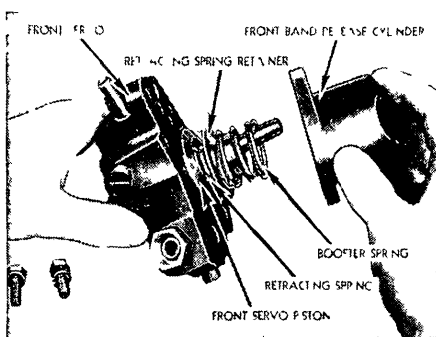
To disassemble front servo, unfasten band release cylinder from servo body and remove cylinder
